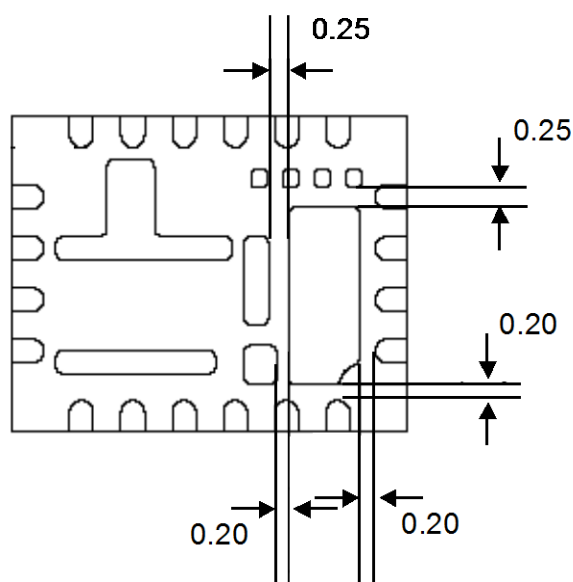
Exposed metal and mechanical dimensions of the package. Gray area represents bottom metal no-connect and area that should be clear of any traces, planes, or vias, on the top layer of the PCB.
